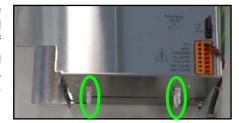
Routing the trimmed 48" connection cables via the cable guides installed
